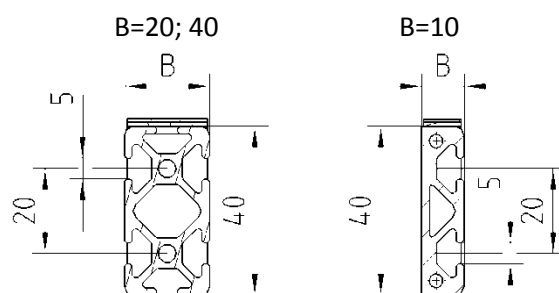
Cross section of the support profile (with sliding plate and belt)
